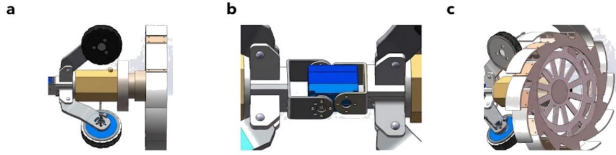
Selected structural details retained from the original SolidWorks model. (a) End support and wheel/pipe-wall contact module. (b) Transmission connection between modules. (c) Enlarged view of the elastic cleaning blade assembly.
